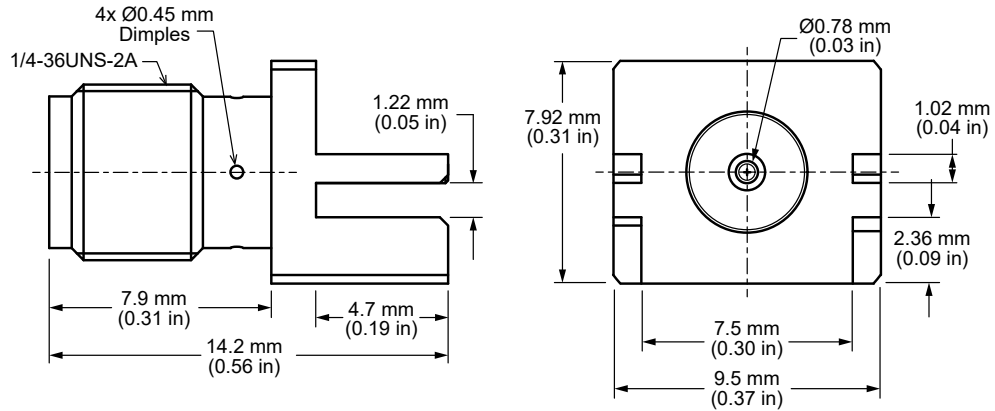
Product Dimensions for the CONSMA020.042-G Connector Table
